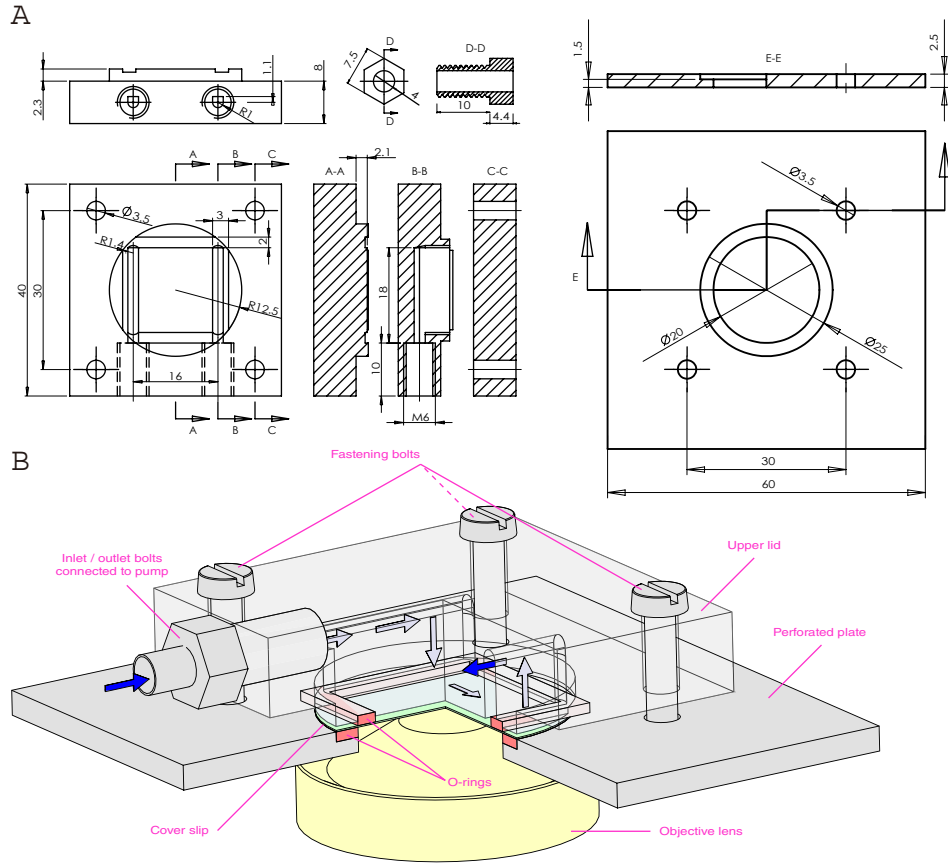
Design drawing and assembly view of flow chamber. (A) Design draw of the flow chamber (unit: mm). The chamber consists of two separated parts: an upper lid and a perforated plate, which is homebuilt using traditional machining out of a PMMA block. (B) Assembly view of the flow chamber mounted with a cover slip and installed on the microscopy stage for imaging. The inlet/outlet bolts are connected to the syringe pump with flow rate of 0.5 mL min^{-1} . Blue arrows show the flow path of the perfusion. Note that the upper lid is shown semi transparent and a quarter cutaway view is applied for a better visualization.
